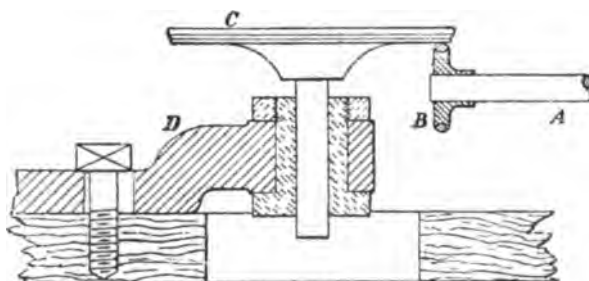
Polishing machine. (Ewing and Rosenhain.)
